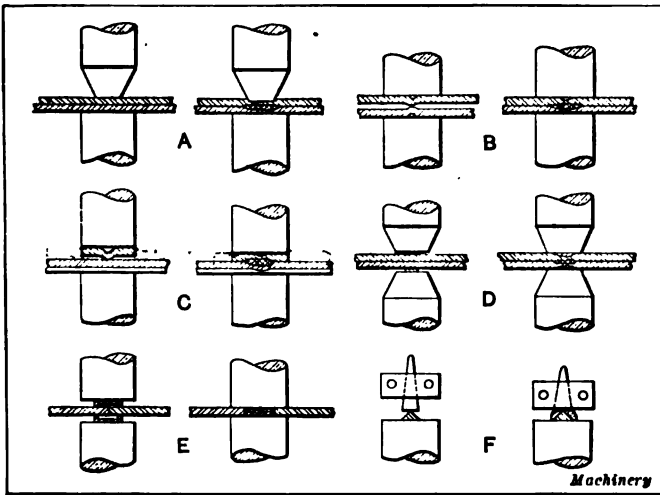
Diagram illustrating Various Processes of Electric Welding accomplished on Electric Spot-welding Machines
